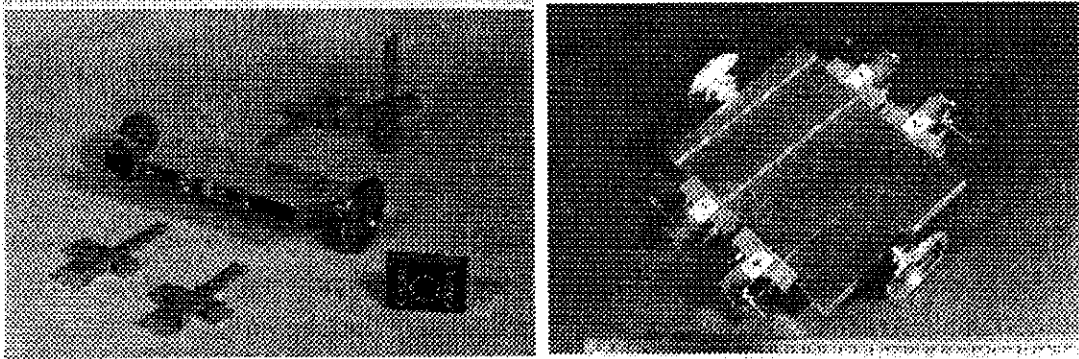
Prototype I before (left) and after (right) welding of feedthroughs and vacuum cleaning.
